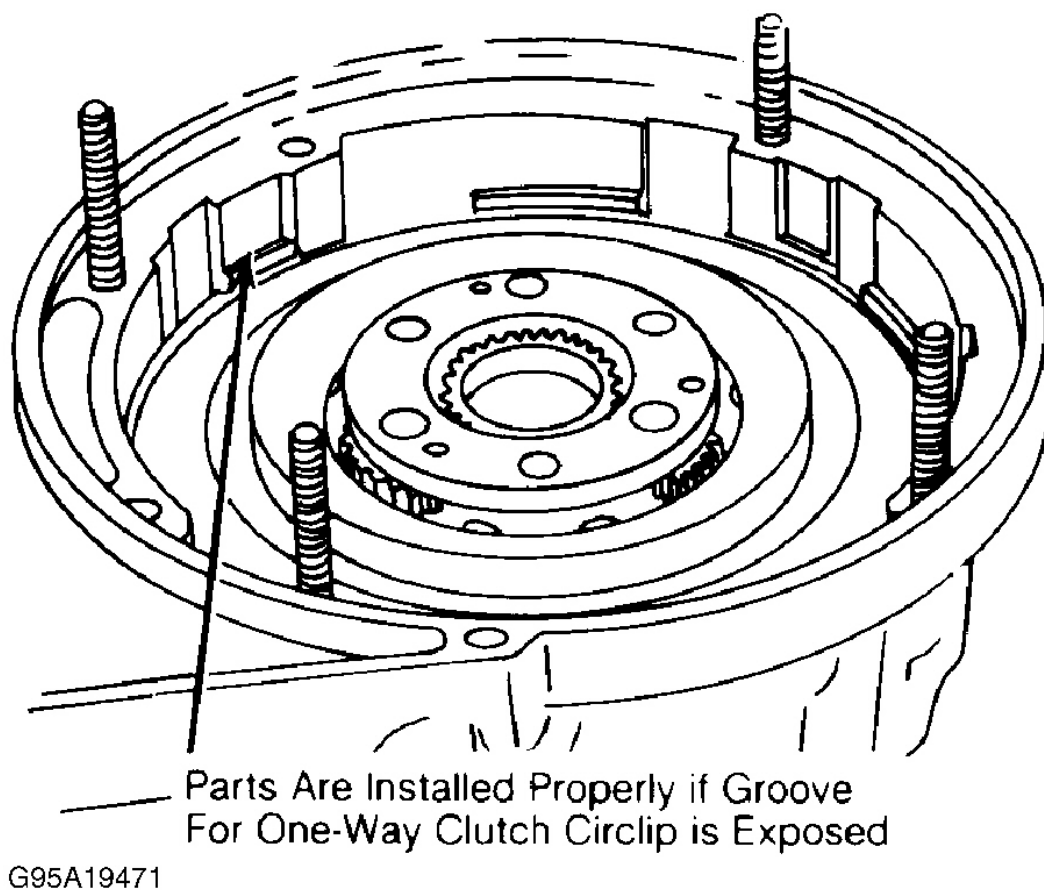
Installing 1st Gear One-Way Clutch Circlip
